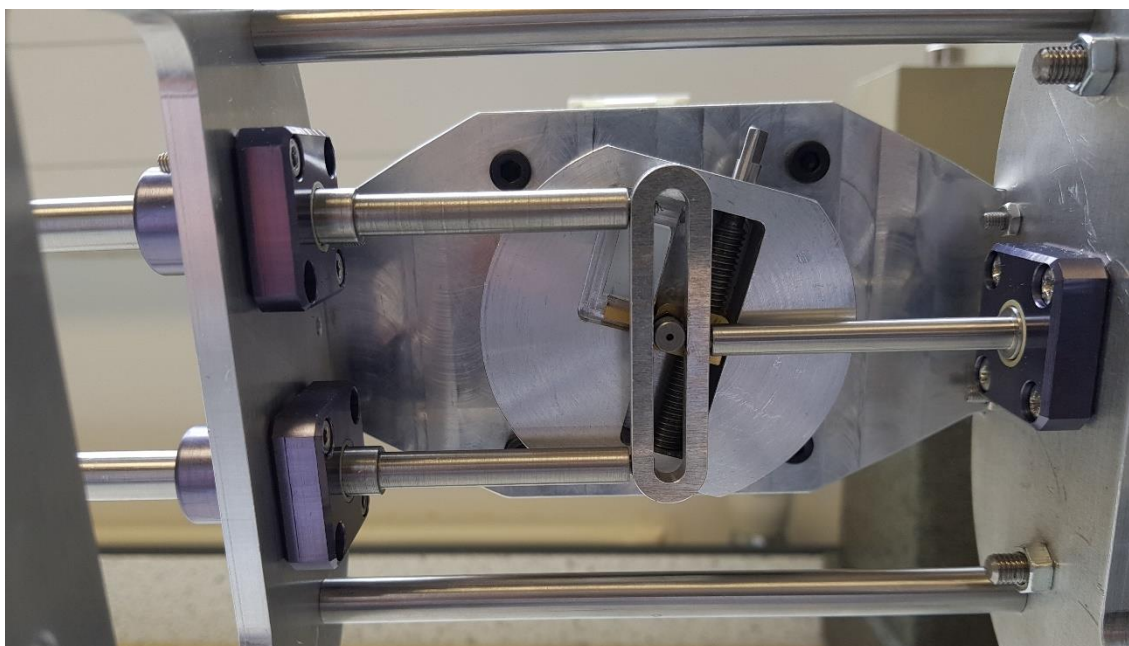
Real image of the oscillatory mechanism front face, showing the link, the front plunger rod, the rear sliding rods, the rotating plate and the manually adjusted pin, on a brass threaded block.
